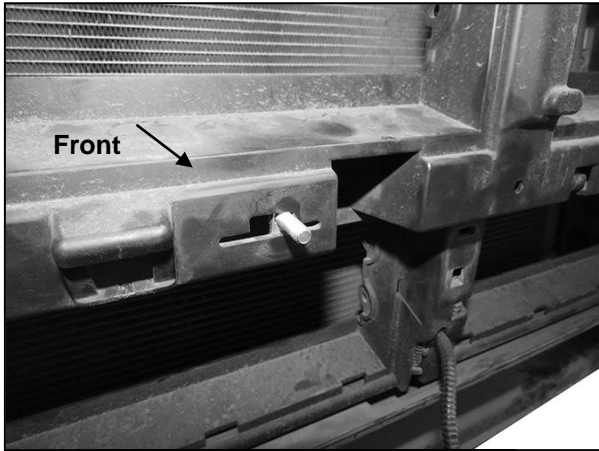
Remove hardware attaching bumper cover to fender. Remove bumper cover
